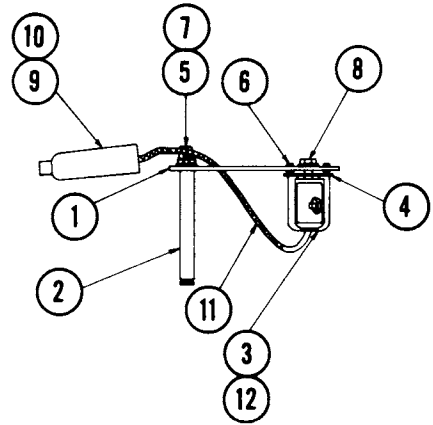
Assembly, Rim Head, WW-5651-1 (Part of Assembly, Figure 5).
